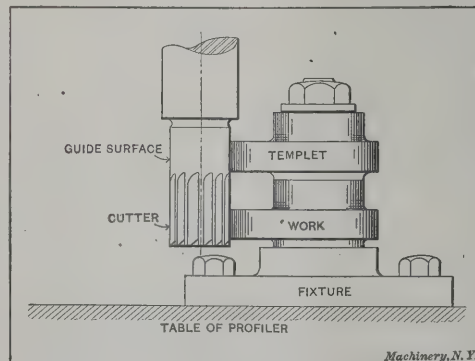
The Simplest and Stiffest Arrangement for Cam Cutting
